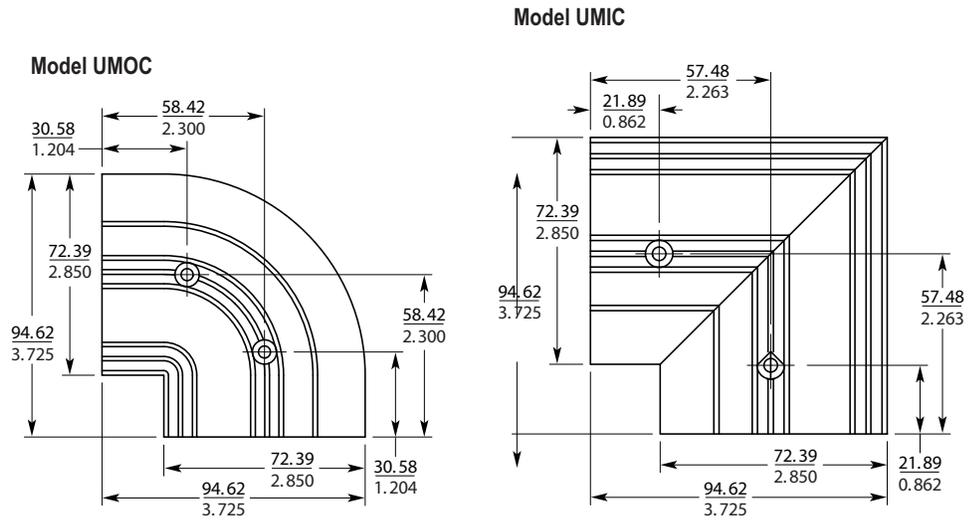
Dimensions and Installation Information for 2-Part Aluminum Base, PVC Cover with Molded Corners
